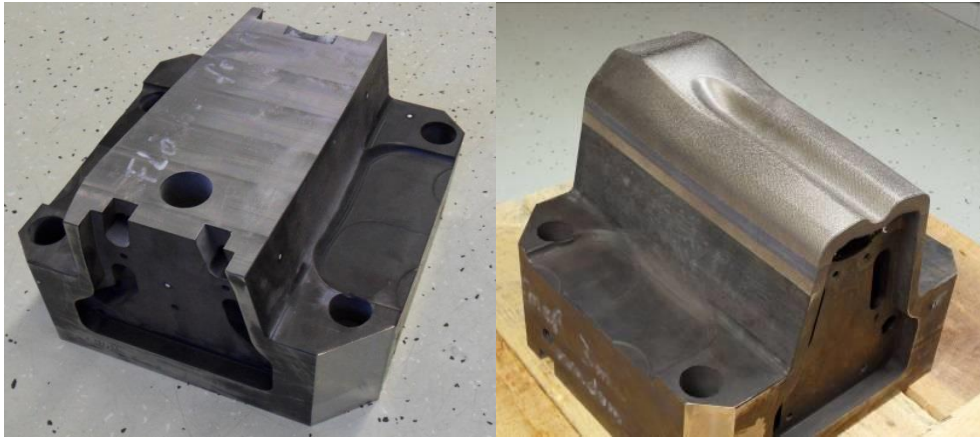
Conventional base body of the tool punch (left) and hybrid tool punch ready for final machining (right)
